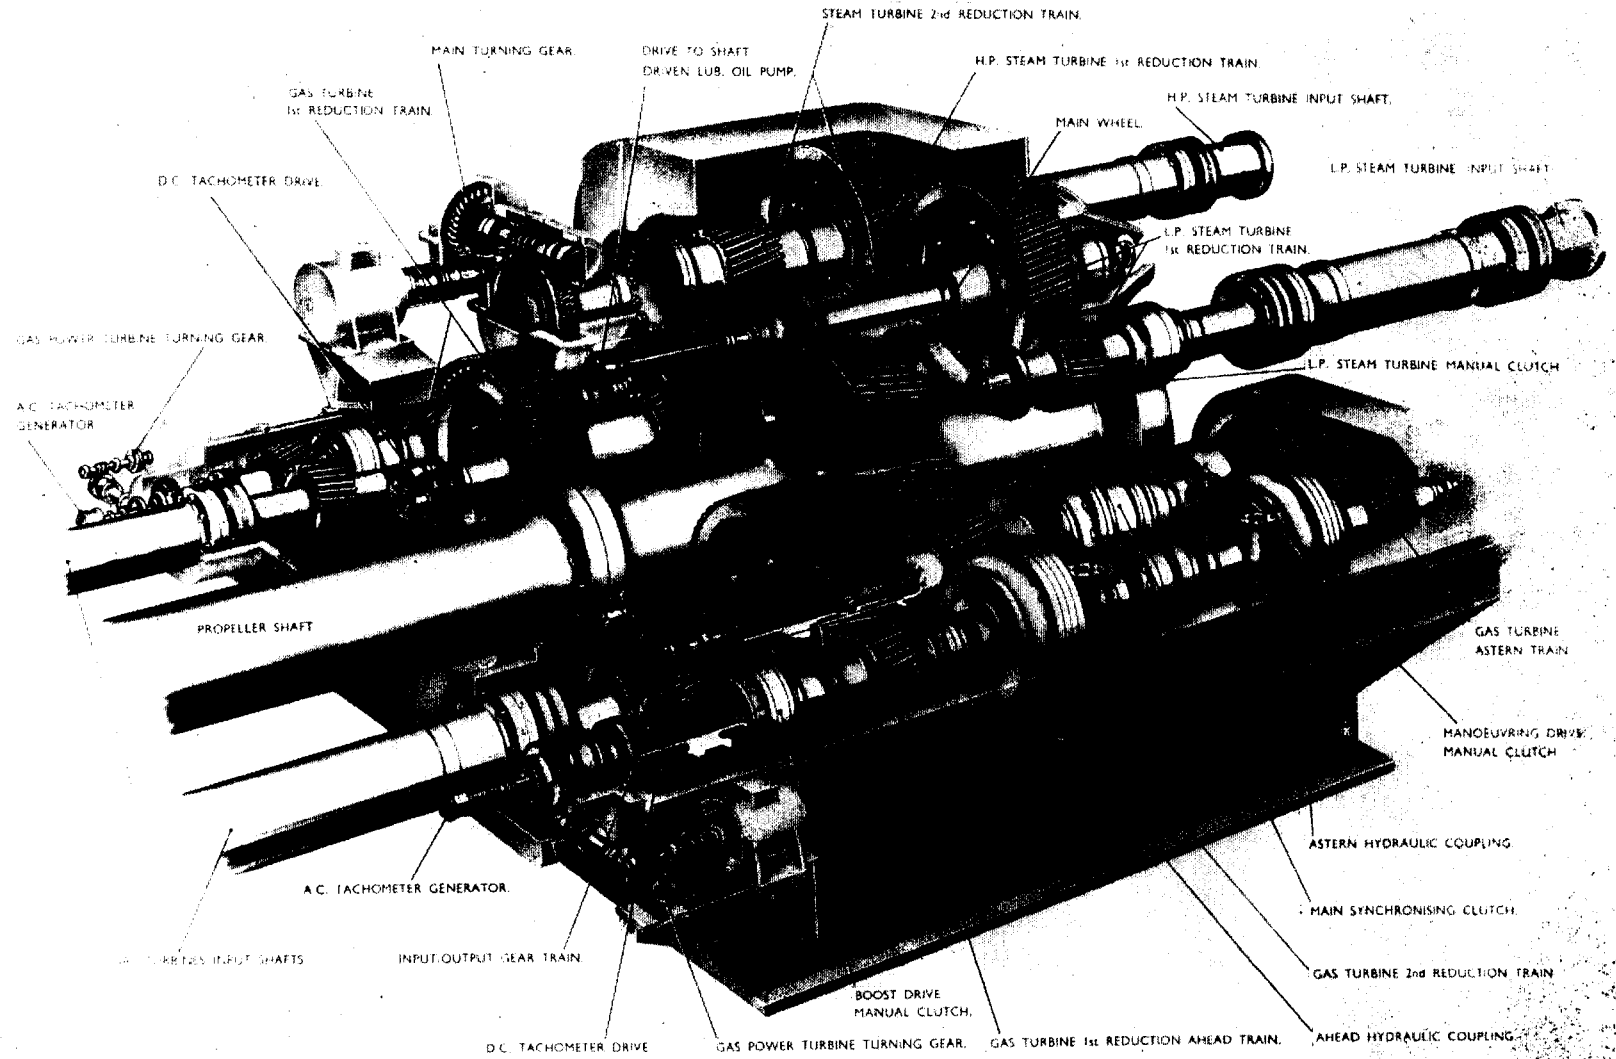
Y.102A—SECTION VIEW OF GEARBOX, PORT SET
